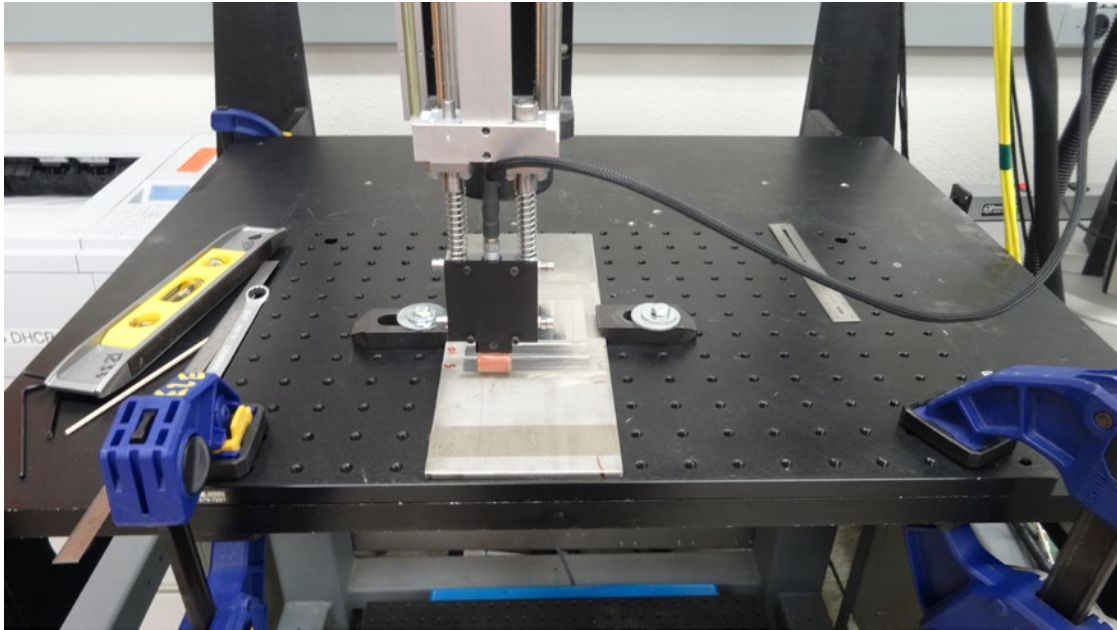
Examination of Stainless Steel Plate with Machined Inconel Cold Spray Surface and Two Subsurface Flaws
